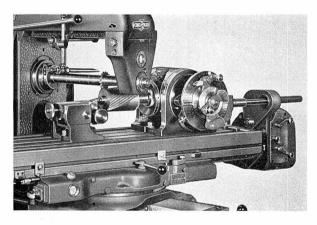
Dividing Head Set-Up for Milling Helical Gears
